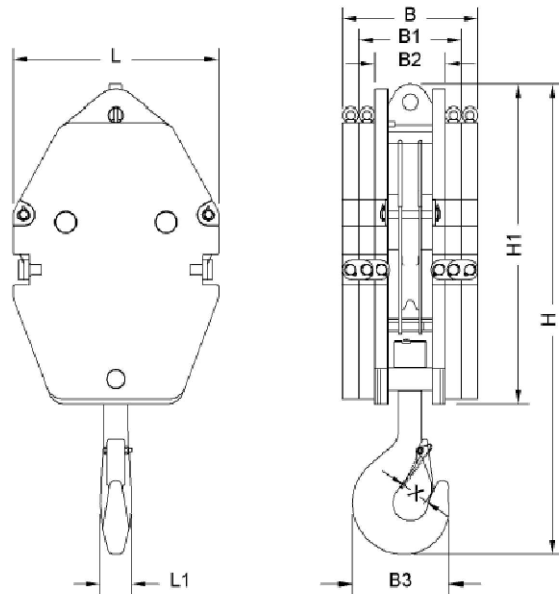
Pulley block dimensions (50 t (110,230 lb))
